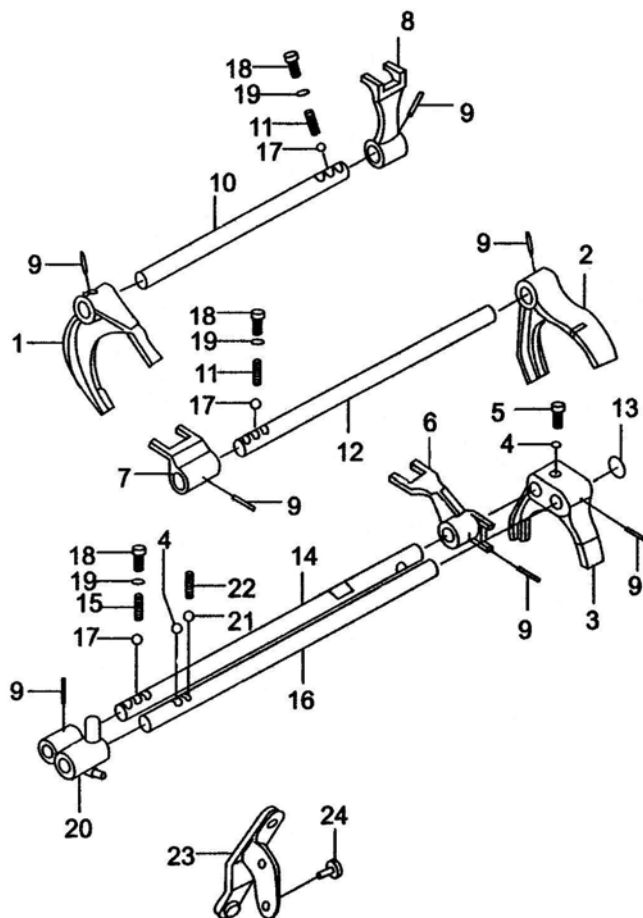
Transmission assembly(five gear) – fork and fork shaft
